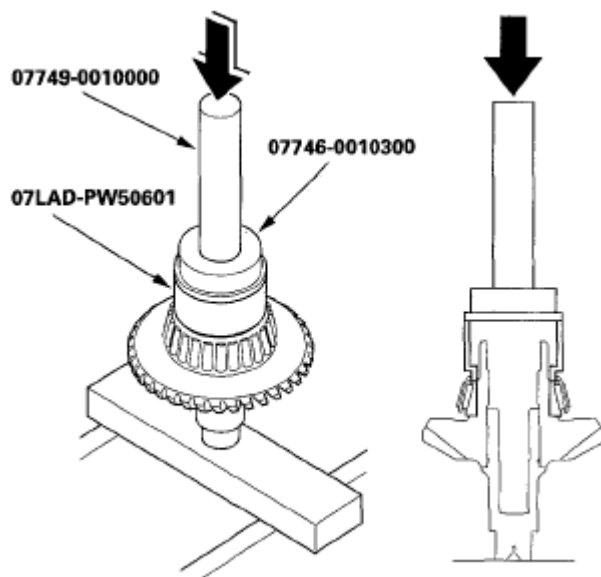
Installing Bearing Onto Transfer Hypoid Drive Gear
